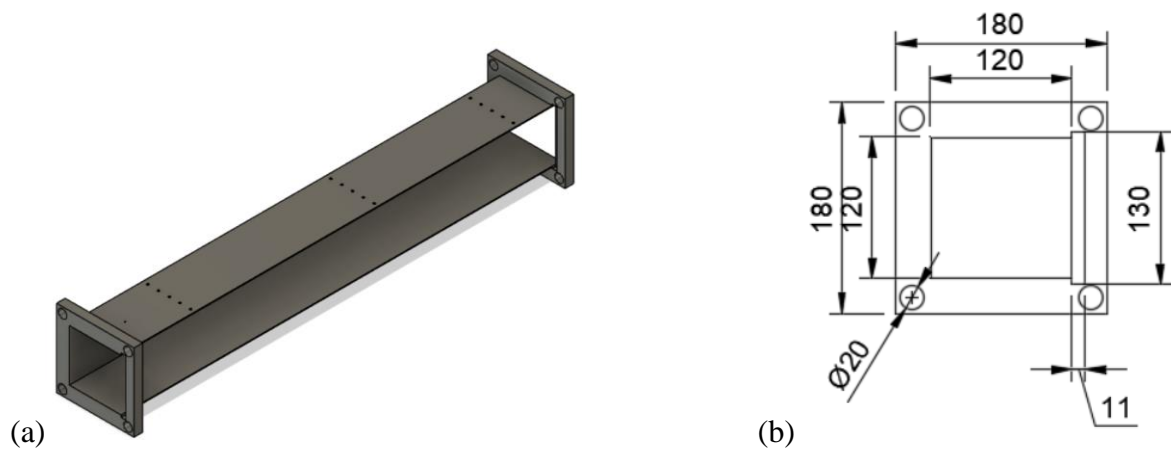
(a) 3D view of test section (b) Front view of test section dimensions
